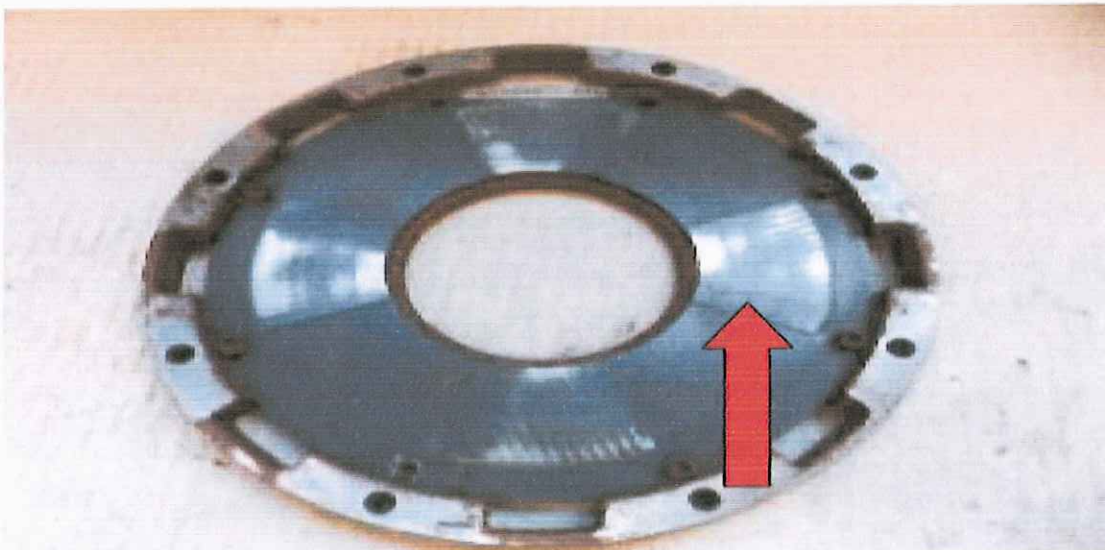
Counter bearing X116 with clear wear marks on air foils.
